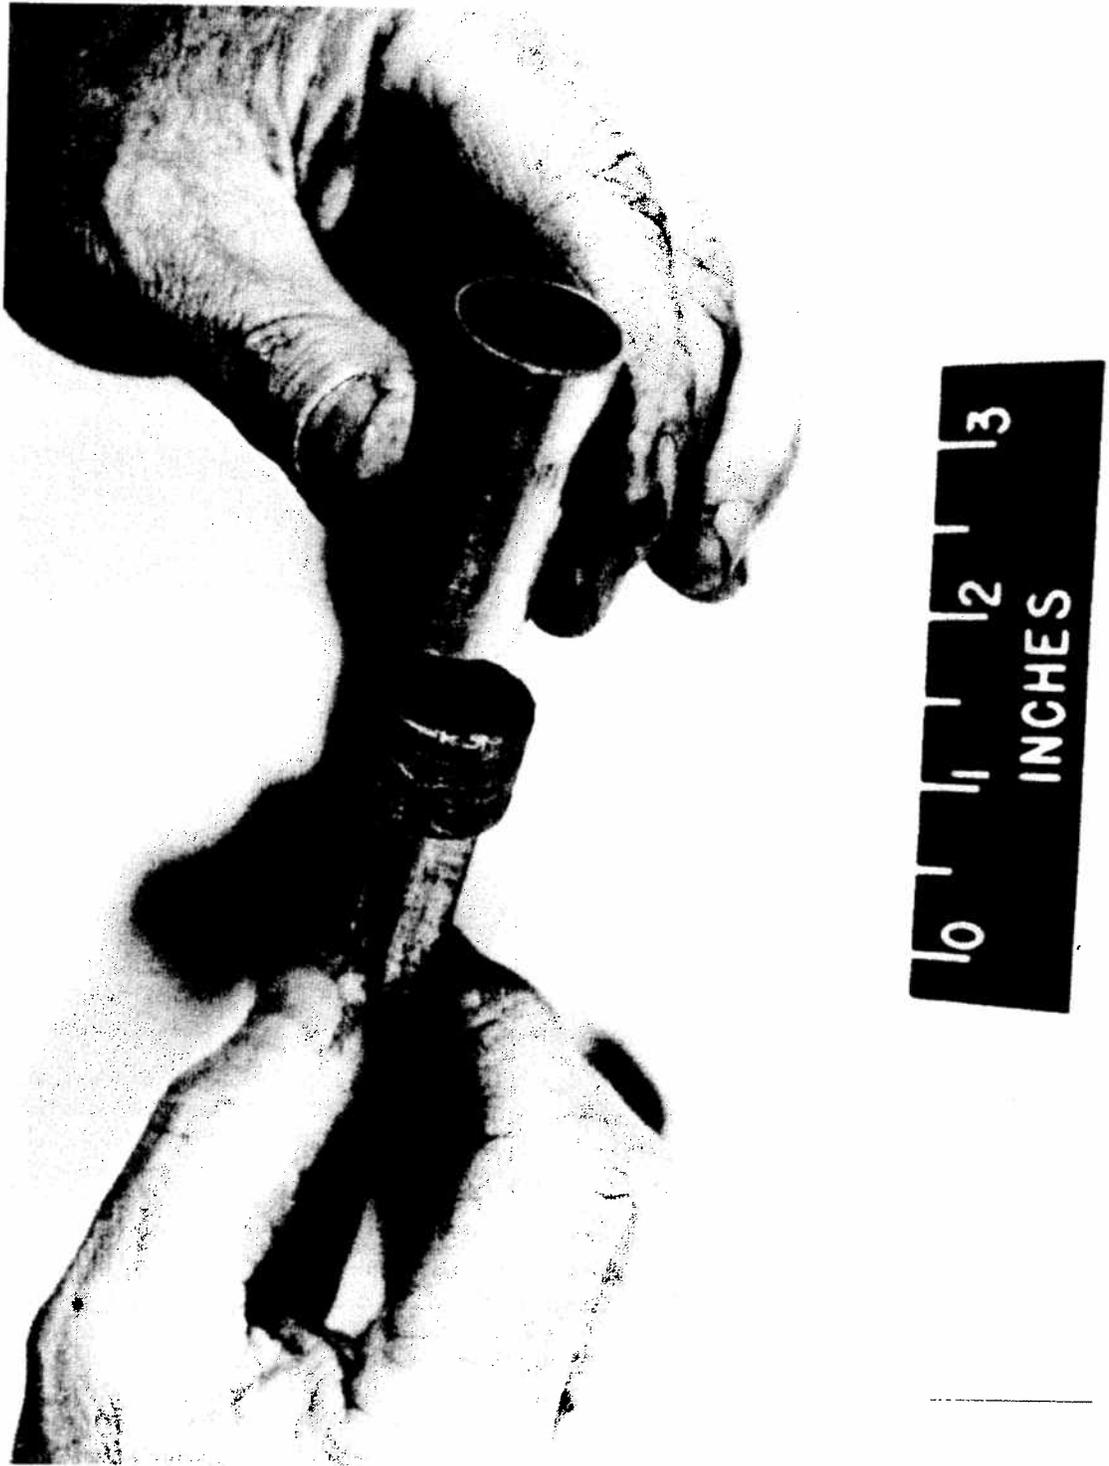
MEASURING TUBE FILLED WITH GREASE
